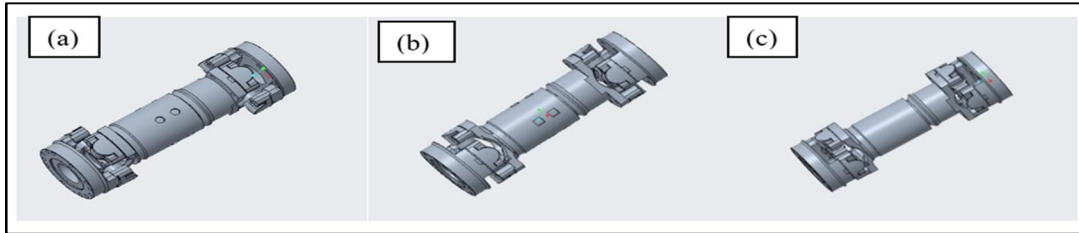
3D Model of Cardan Shaft: (a) Circular Cut, (b) Rectangular Cut, and (c) No-cut
